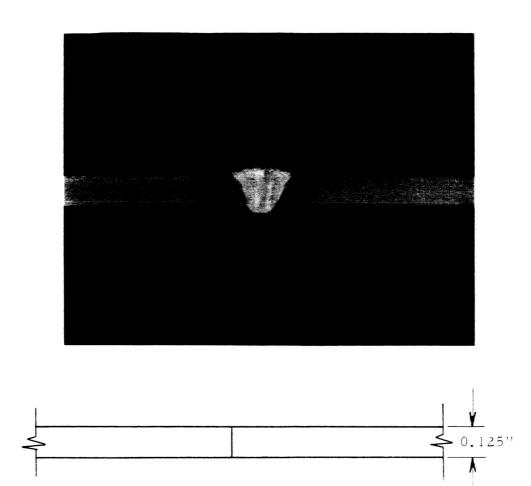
TYPICAL CROSS-SECTION AND JOINT PREPARATION FOR 0.125-INCH TIG WELDMENTS
